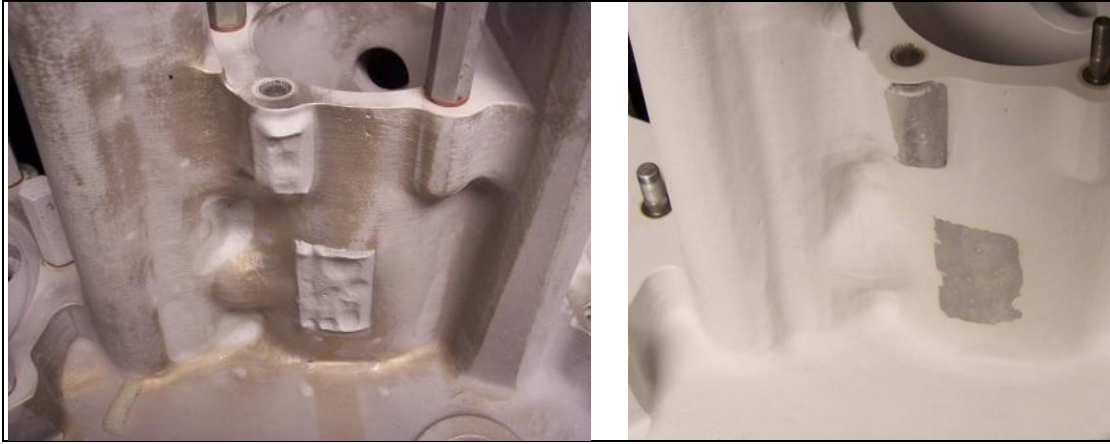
Cold spray repair of as-cast surface on H-47 accessory cover. Left: after cold spray repair. Right: after blending of repair and Immersion Tagnite.
